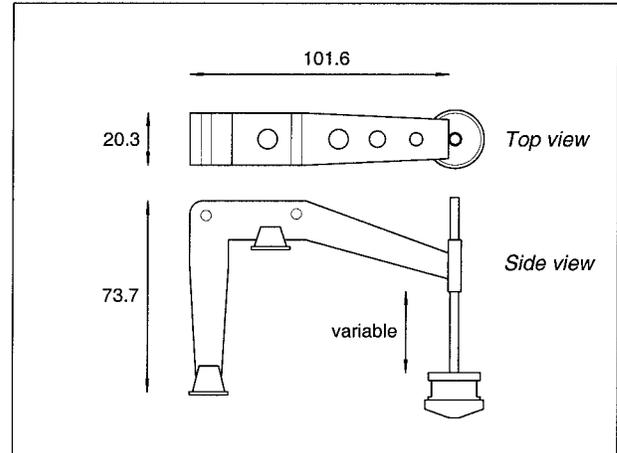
Schematic drawing of boom design. Dimensions are shown in centimeters.
